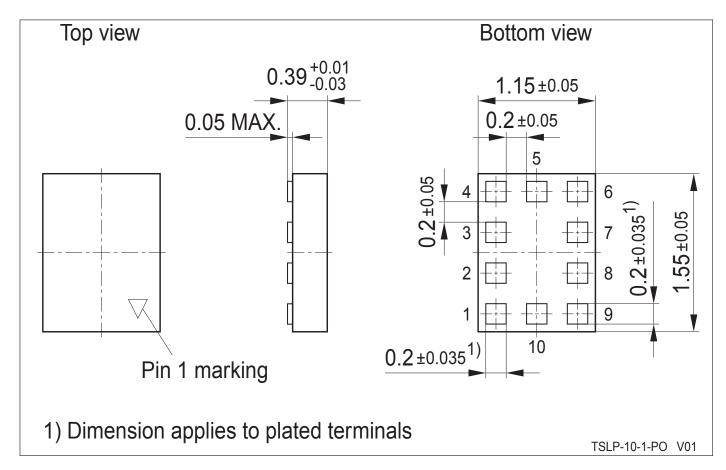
TSLP-10-1 Package Outline (top, side and bottom view)
